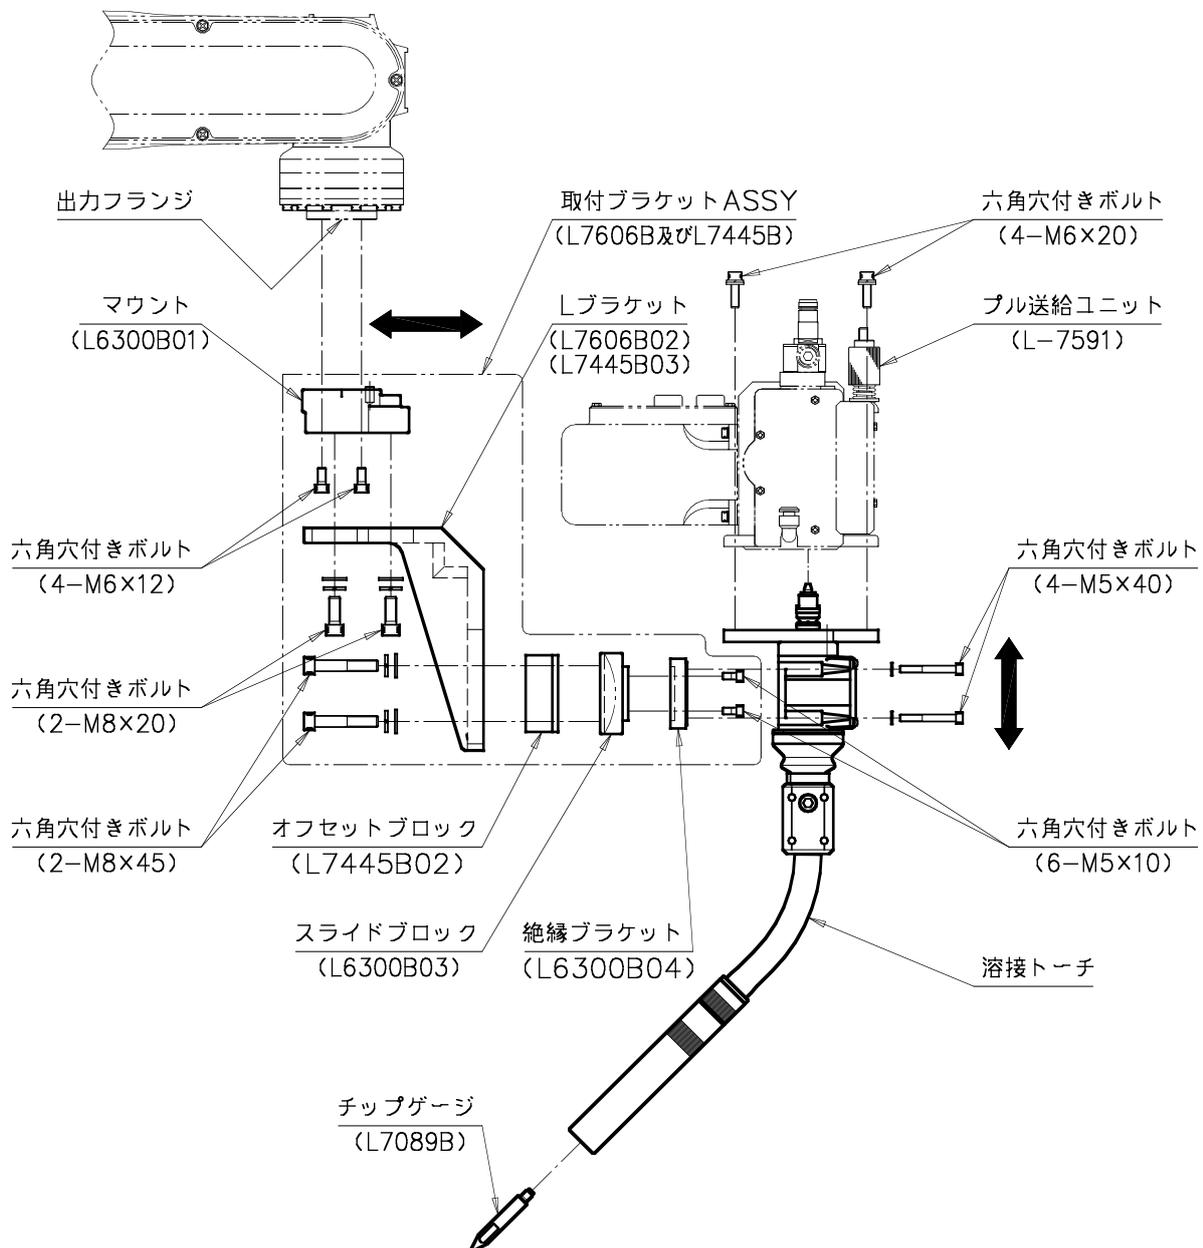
Mounting torch (mounting bracket) and pull feeding unit
